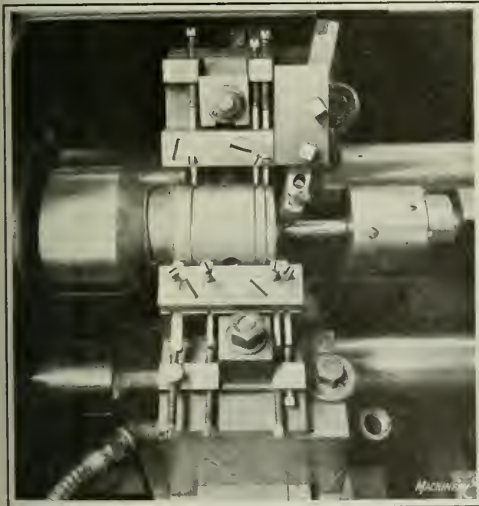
Machine provided with the Tooling Equipment Illustrated in Fig. 9
